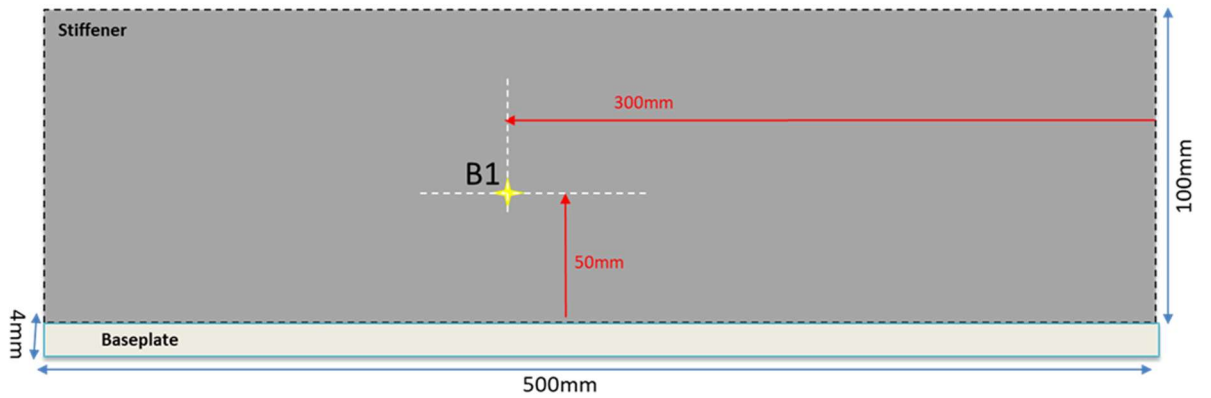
Diagram showing welded test piece dimensions, location of thermocouples and tack welds
